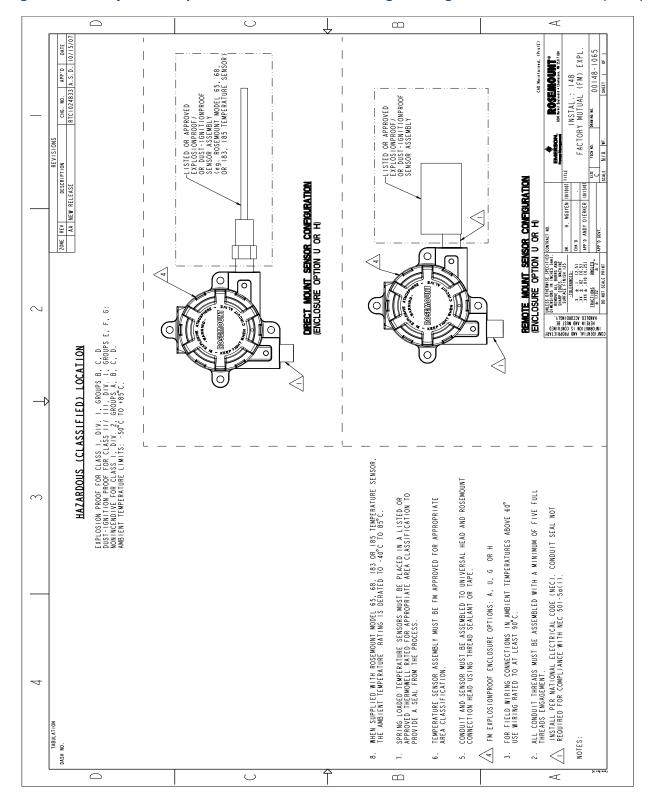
Factory Mutual Explosion-Proof installation drawing, Drawing no. 00148-1065, Rev AA (1 of 1)
